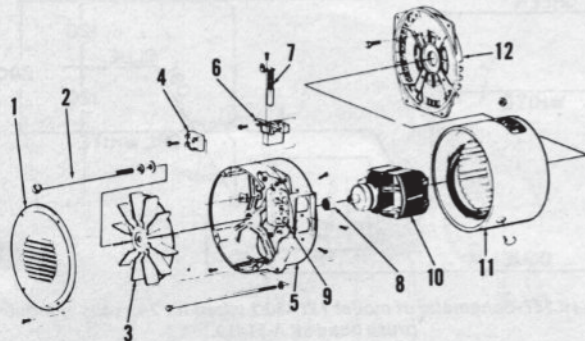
Exploded view of models 128A10-1B, 129A15-1B, 130A22-1B and 131A30-1B. Other models are similar.
